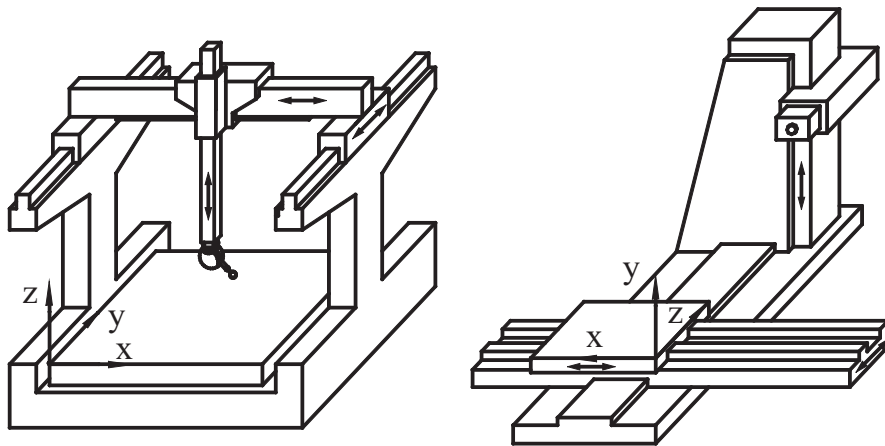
A moving bridge type CMM and a C-type milling machine.
